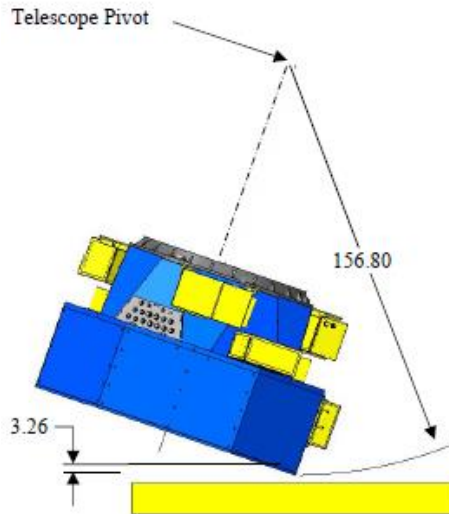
Side view of Binospic on the MMT showing allowed swing clearance
